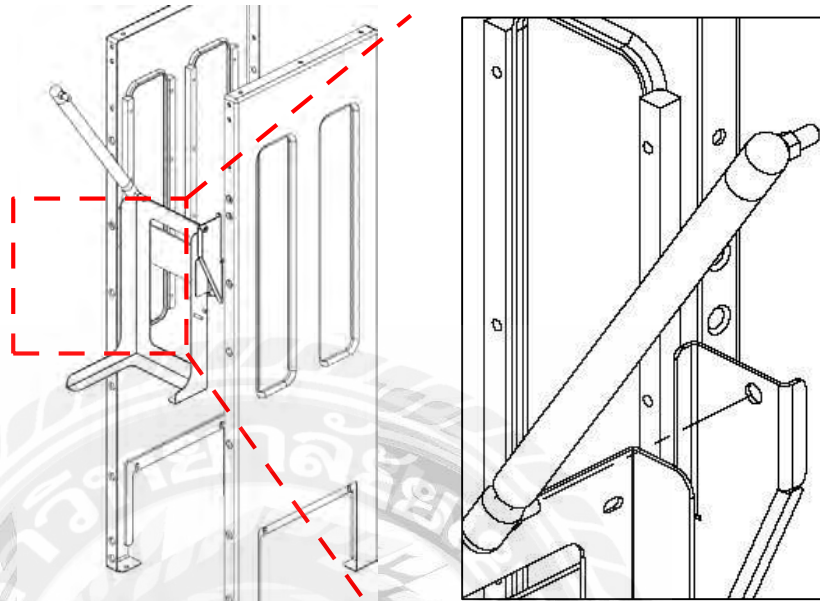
Location of Screw Hole for Inserting Back the Gas Spring
